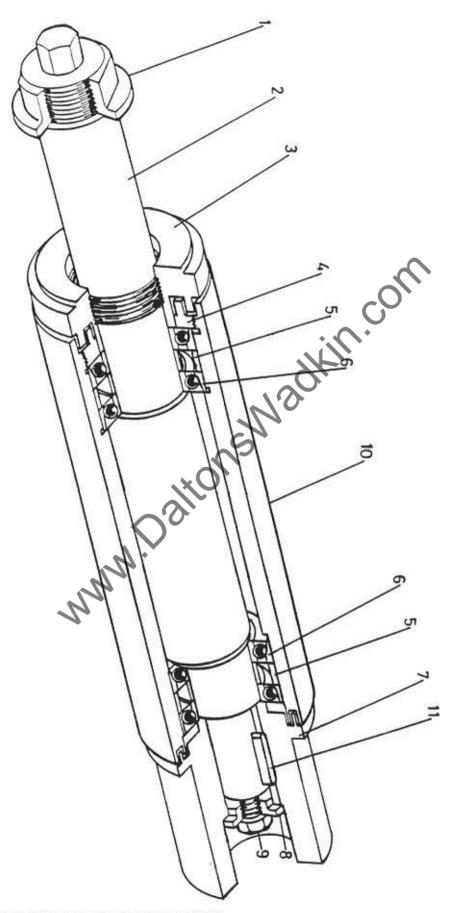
NEAR SIDE HEAD SPINDLE UNIT
